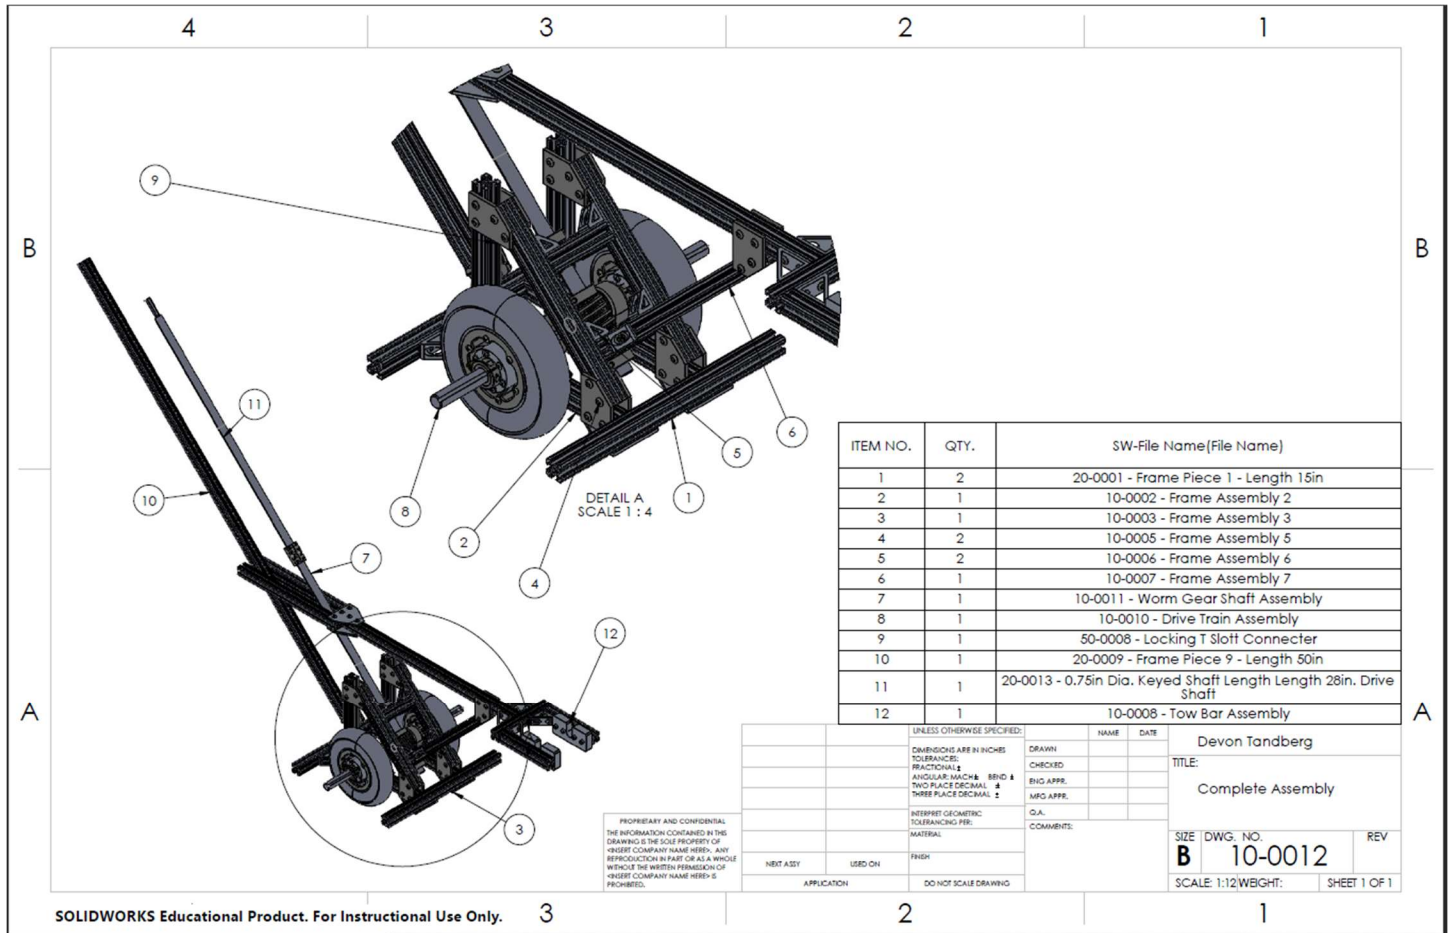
Assembly 10-0012 Drawing – Complete Assembly
